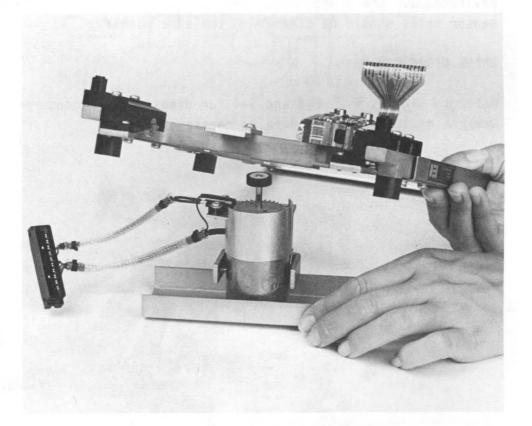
MOTOR ASSEMBLY REMOVAL
